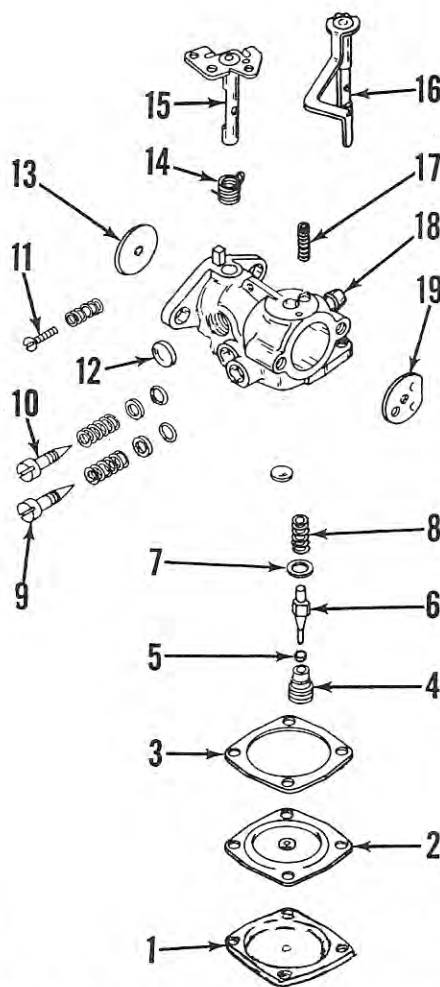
Exploded view of Power Products, gravity feed, diaphragm carburetor used.
